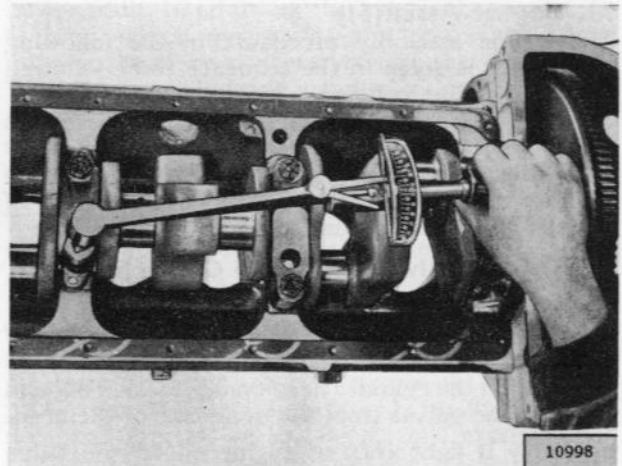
TIGHTENING MAIN BEARING CAP BOLTS
